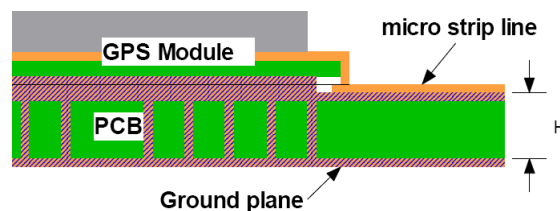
PCB build-up for Micro strip line on 2-layer PCB
